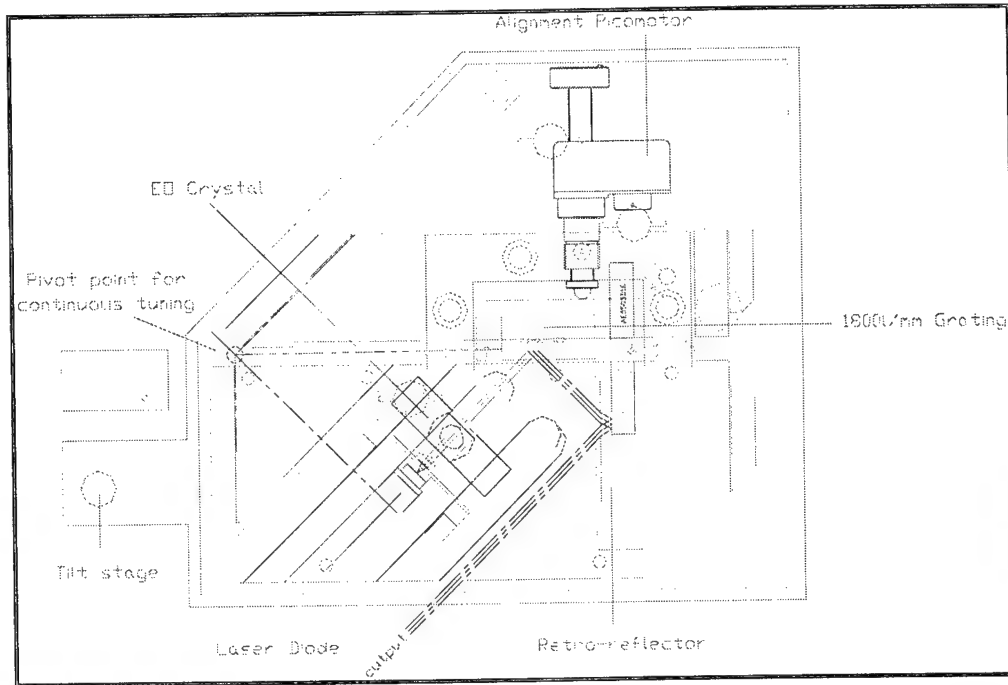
Top view assembly drawing for the chirped laser with a nominal wavelength of 795nm.
